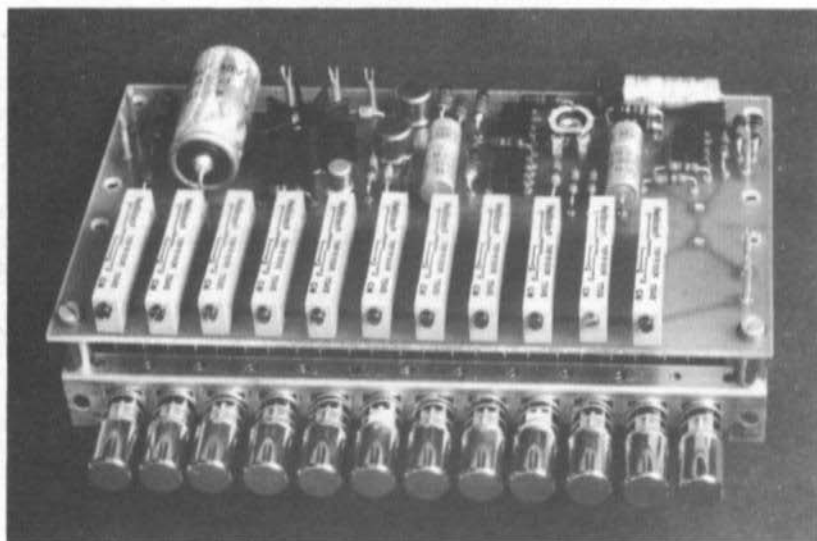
An author's prototype; the pushbutton switches are directly soldered to the PC-board
